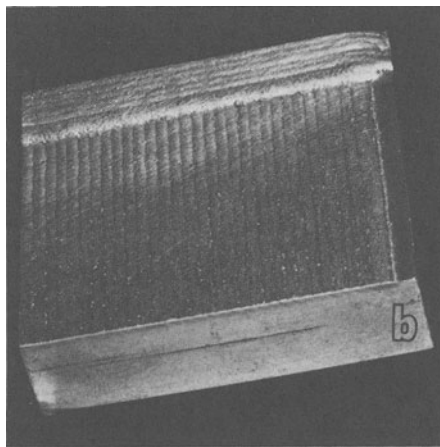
(b) a laser-clad plate. Plate thickness 12.5 mm. Single layer is 0.3 mm thick, double layer 1.5 mm thick.
